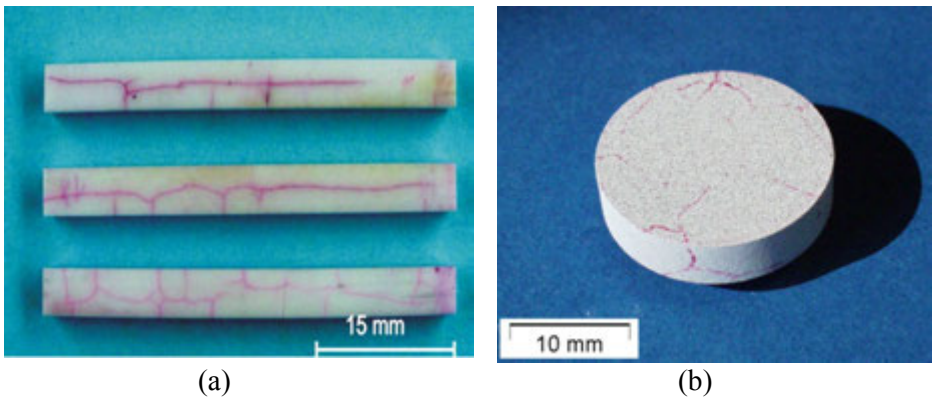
Thermal shock cooldown cracks in alumina bend bars (a), and a disk (b). The cracks are highlighted by red dye penetrant. (courtesy of R. Danzer and T. Lube, Mountain Univ. Leoben)
